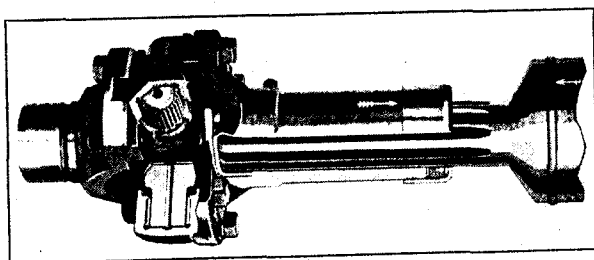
Cut away view of the front universal joint showing the needle type roller bearings
